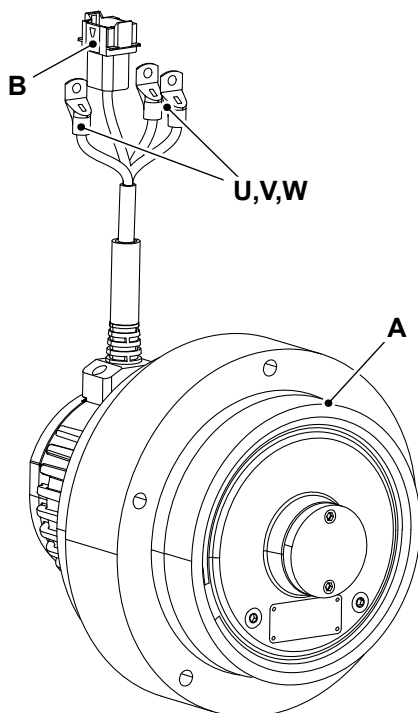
Component Identification of Wheel Drive Motor(S1932E EDRV)
